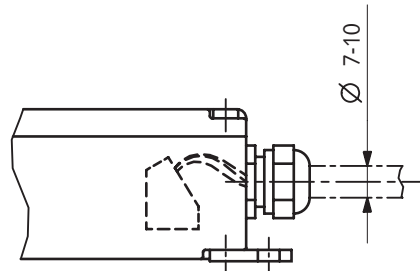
Terminal screws 1,5 mm²/Screwing PG9, Type 5037B3...
